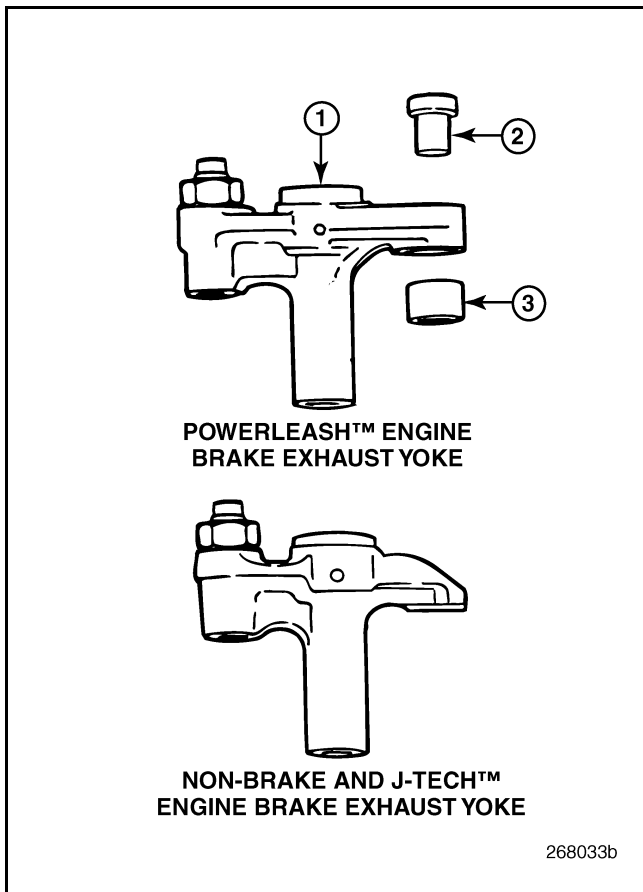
Exhaust Yoke, Actuating Pin and Valve Stem Cap
